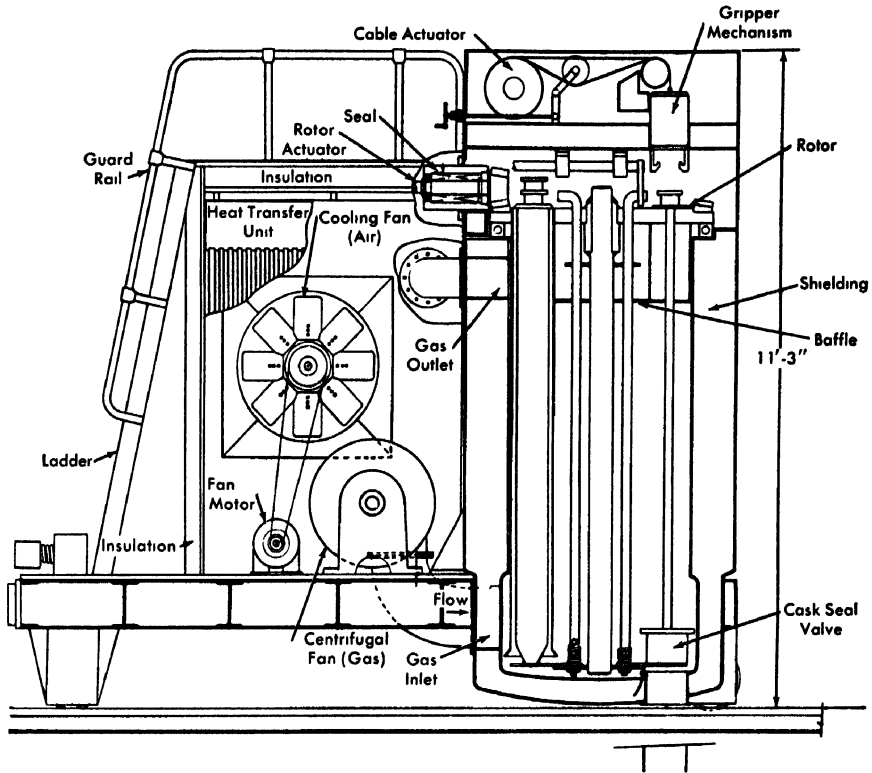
Sectional elevation of cask car, showing fuel element storage rack.
